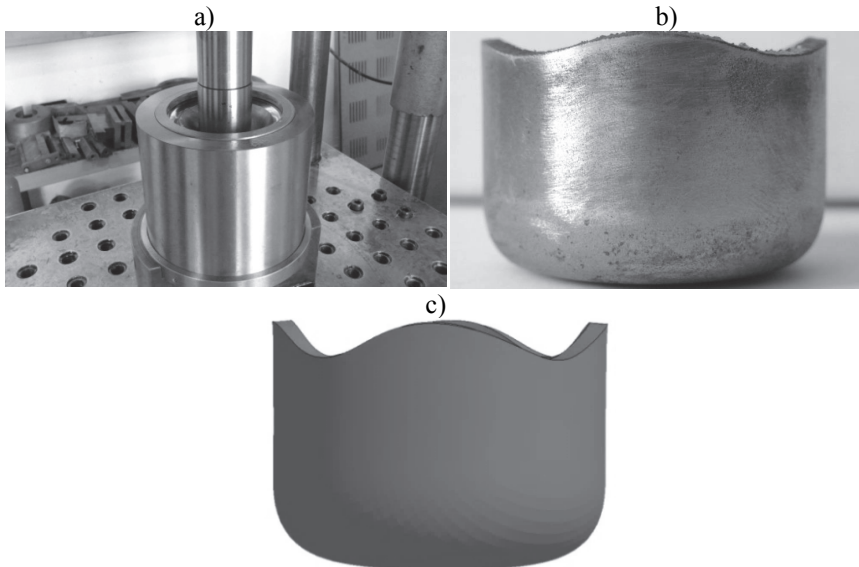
Stand for tests of drawing process: a) course of process, b) finished product, c) product obtained with numerical method
